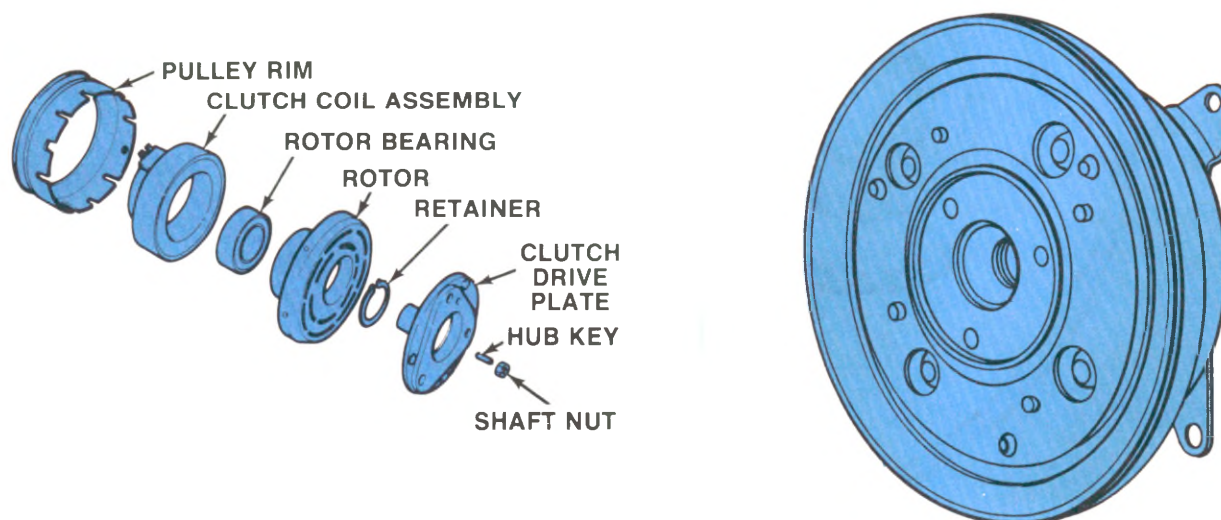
GM 4 Cylinder Compressor Clutch & Pulley Assembly
